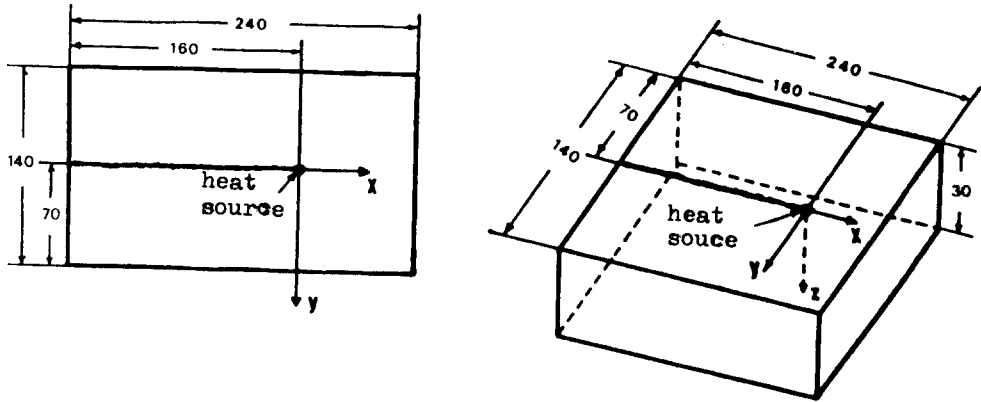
Dimensions of welded pieces and coordinates system.
